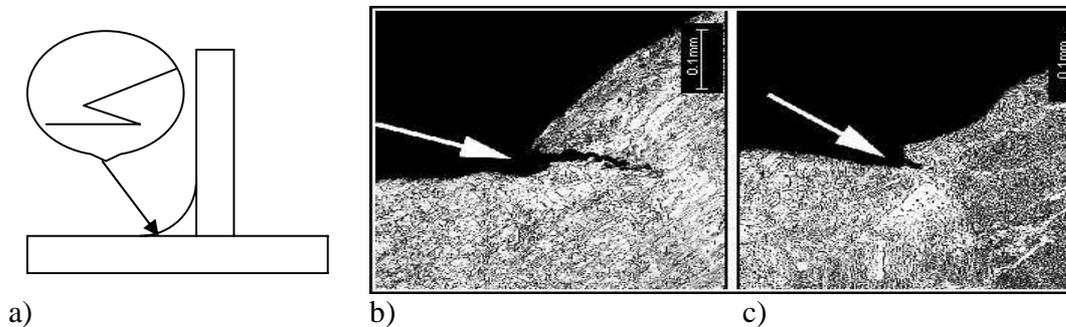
a) Schematic illustration of imperfection in a weld with good weld profile b) Cold laps with 0.15 mm depth c) Cold laps with 0.04 mm depth.
